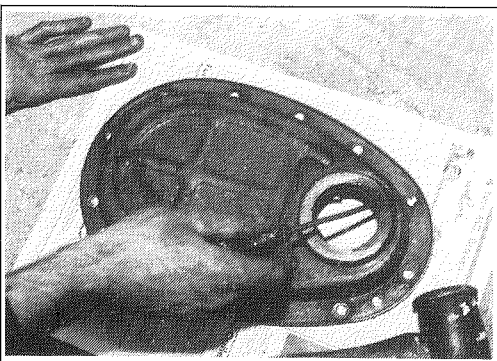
Moving back to the cover, carefully prise out the old oil seal.
